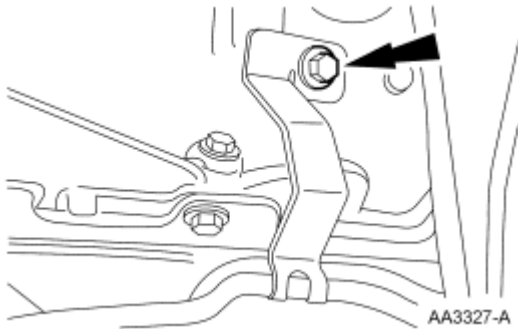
Transmission Cooler Tube Support Bracket Bolt
